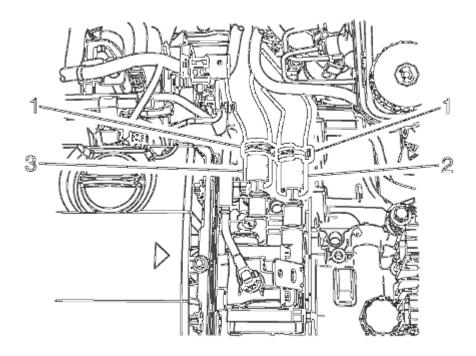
Radiator Air Inlet/Outlet Hose And Clamp Courtesy of GENERAL MOTORS COMPANY
